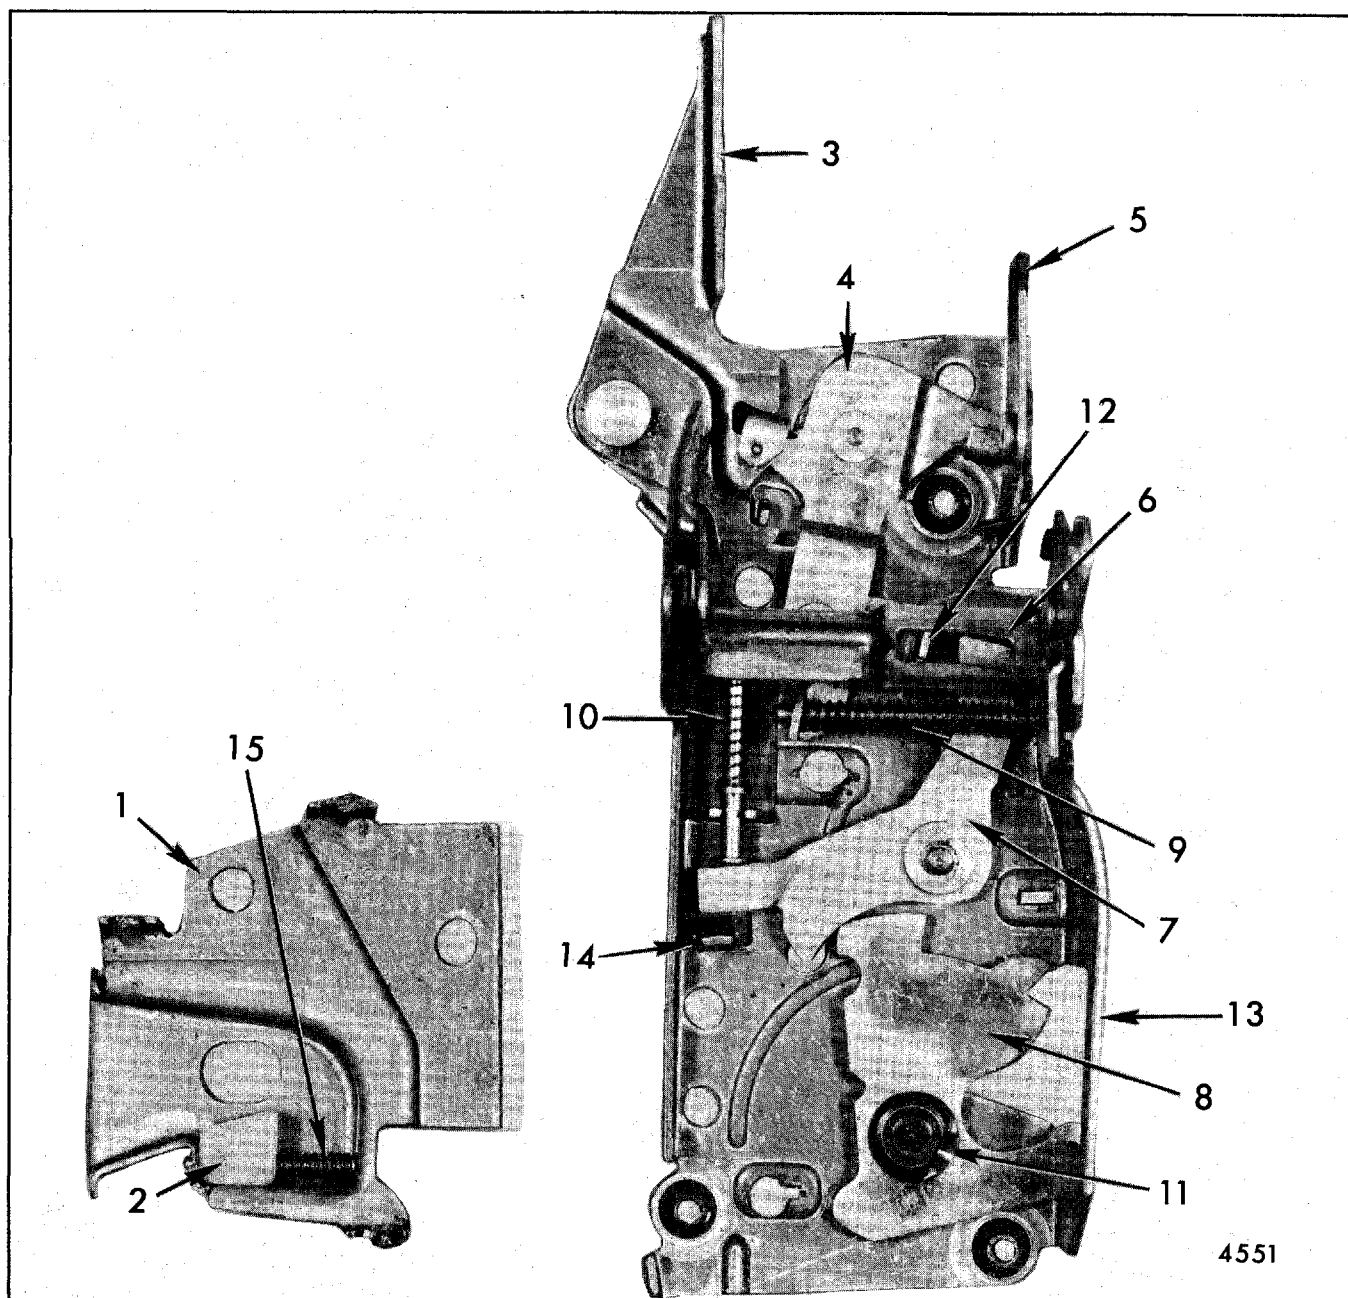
Front Door Lock - "A, B, C and E" Styles
